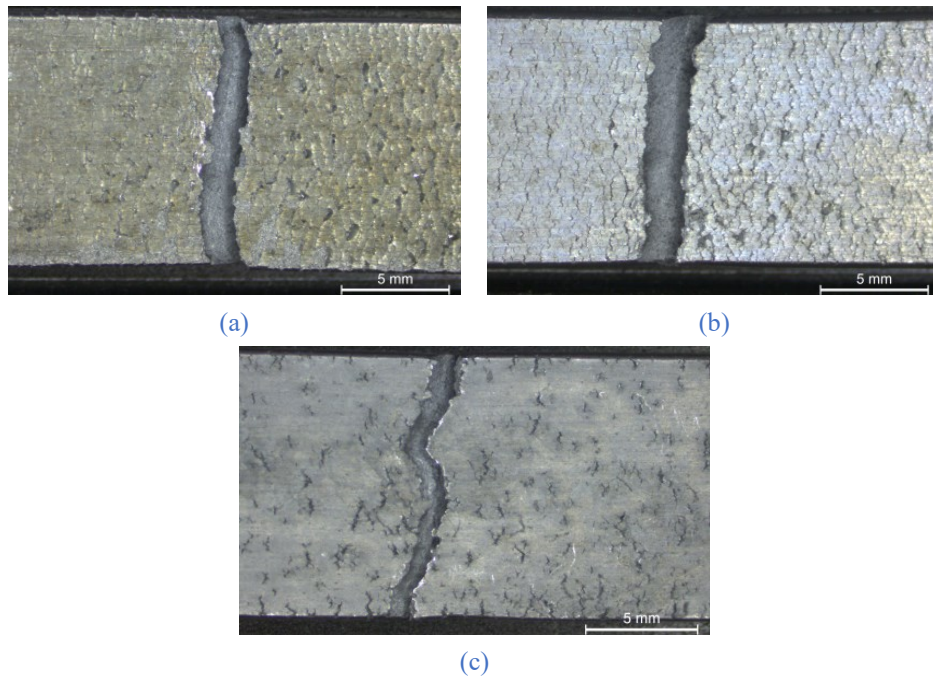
Typical photographs of the fractured surfaces of AA2024-T3 pre-corroded tensile specimens exposed to EXCO solution for (a)-(c) 2 h, 4 h and 24 h, respectively.
